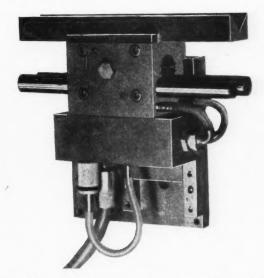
Continuous measuring and indicating unit for use on through-feed centreless grinders.
